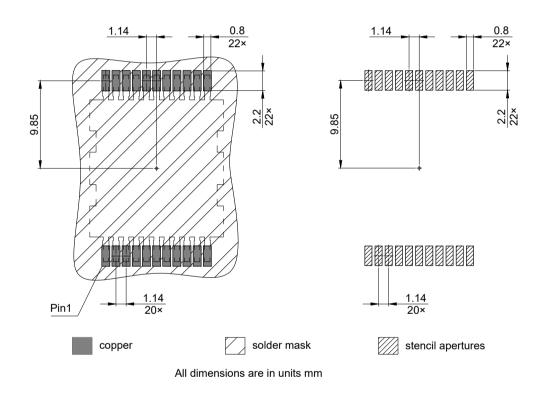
Footprint drawing PG-HDSOP-22, dimensions in mm
